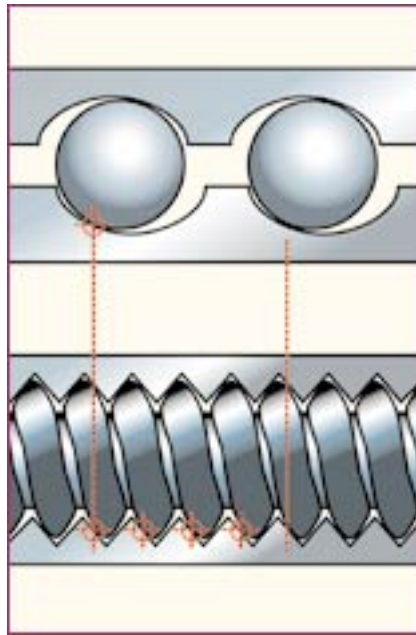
Roller screw and ball screw load bearing diagram [86]
